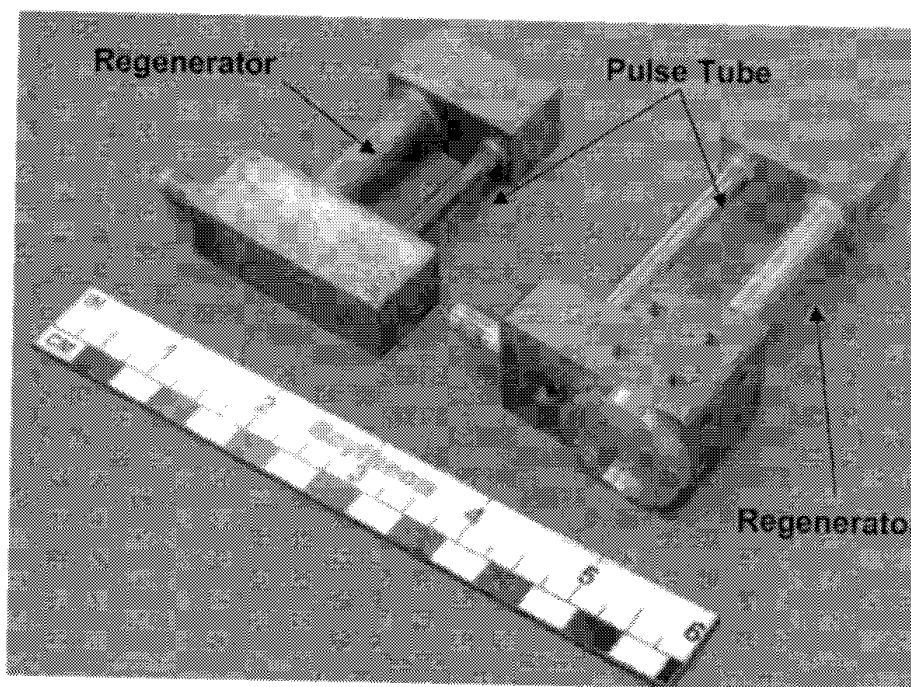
Comparison of braze coupons from original brassboard cold head assembly (left) and new RSP2 cold head (right). Tube sizes same as actual hardware. Cold blocks similar to actual unit but modified to meet objective test requirements.
